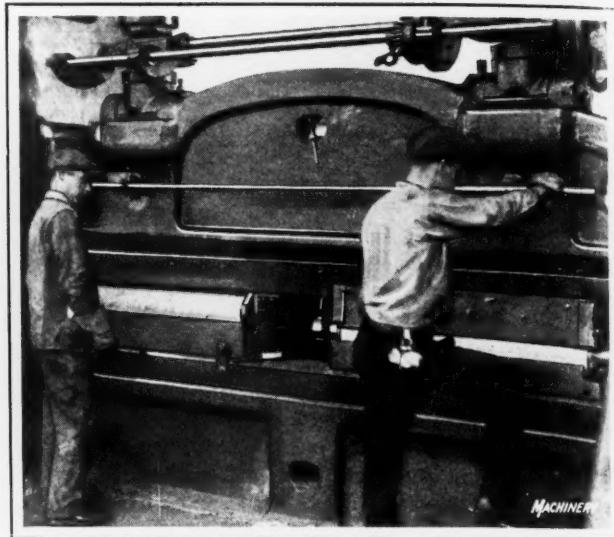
Forming Cartridge Tank Cylinders on Press equipped with Two Forming Dies
